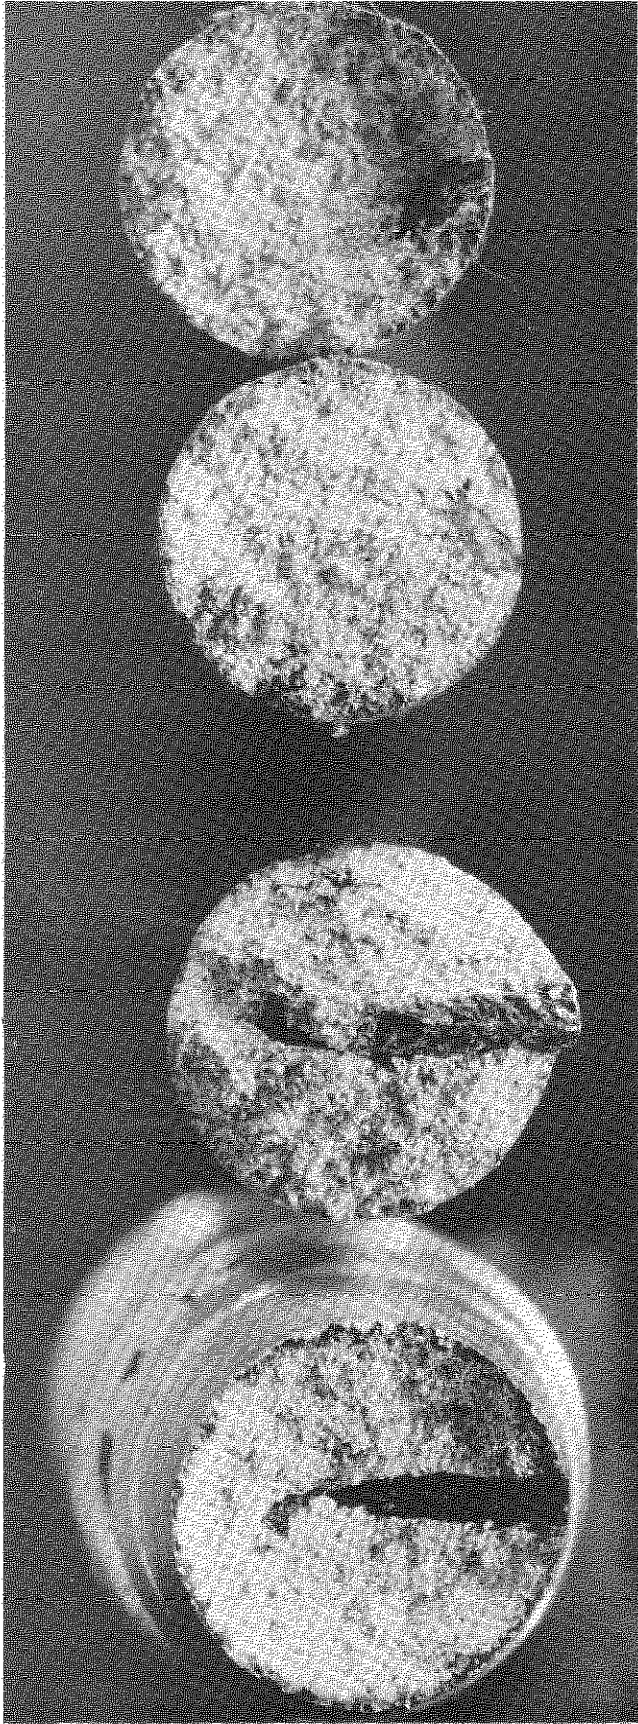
Typical inclusions on tensile fracture surfaces
